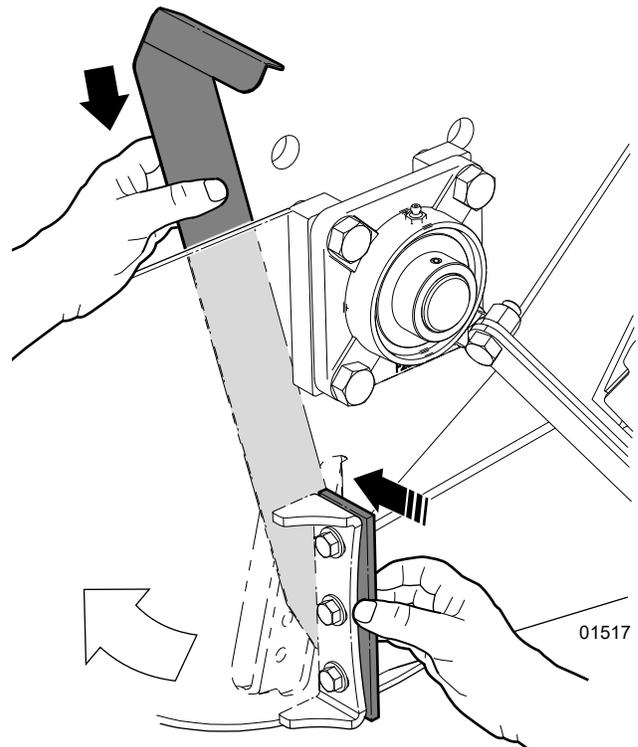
Checking Ledger Knife Clearance with Ledger Setting Gauge
